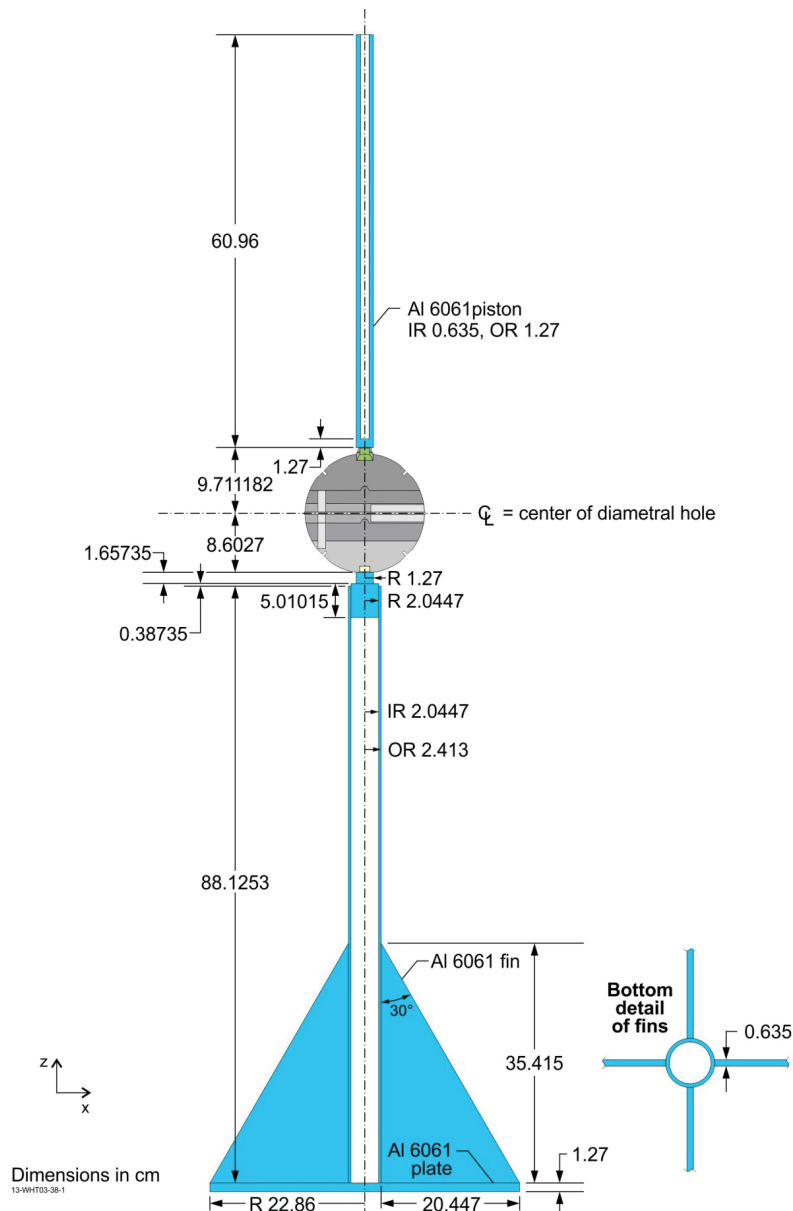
Cross-Section View of Lower Support Stand and Support Rod.
